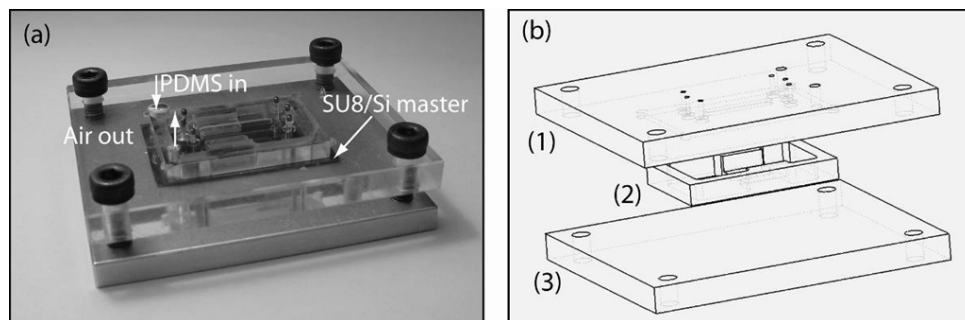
(a) Photograph of the mold used for the fabrication of the PDMS chip. PDMS is injected in the mold using a disposable syringe from the PDMS inlet while the air outlet is used to remove eventual bubbles trapped in the PDMS. (b) Exploded view of the mold with the cap (1), the frame (2) and the base (3).
